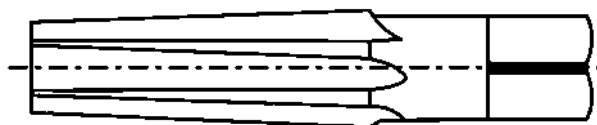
, A parallel shank socket reamer for Morse Taper.
